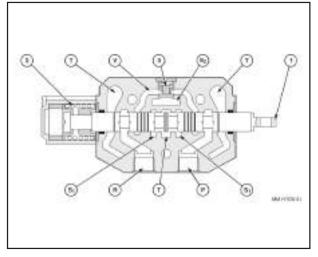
SYSTEM RELIEF VALVE OPEN
